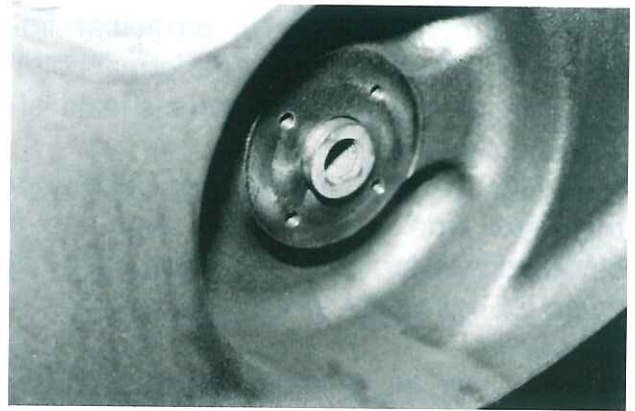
After Removing Oil Injection Pipe Retainer (164)
